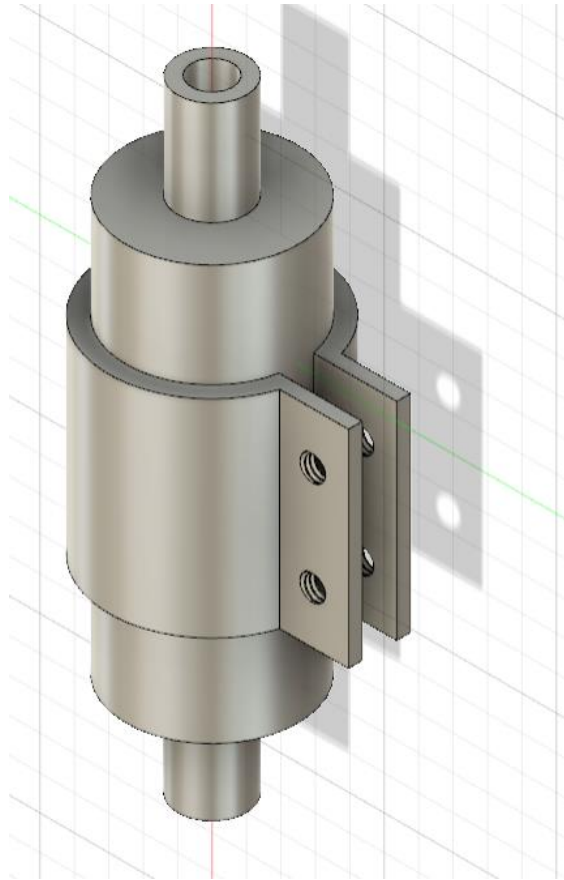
3D Model of the Adapting Cylinder (Transfer Tube) assembled with the Heating Collar.
